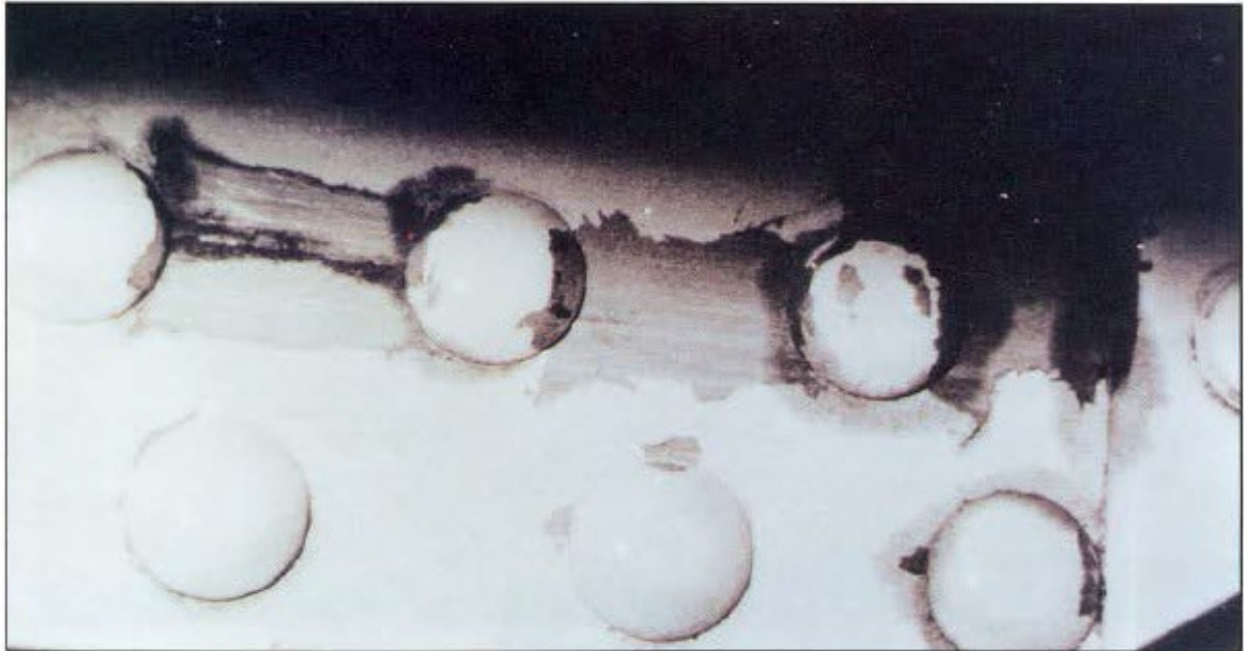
Faying Surface Corrosion on Wing Spar Chord with Corrosion Cracking Also Visible
